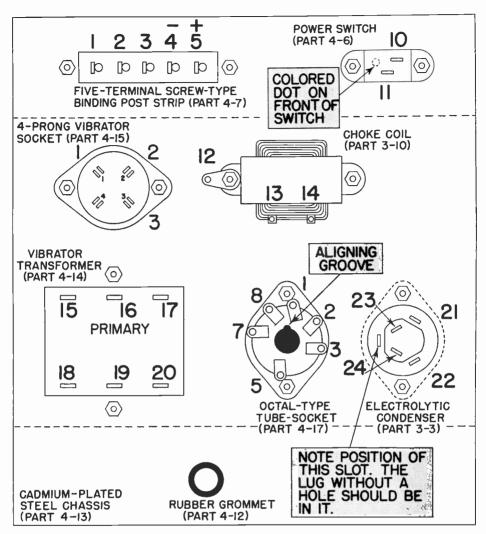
Bottom view of chassis with sides spread out, showing exact positions of all parts which are mounted directly on the chassis, and showing positions of all numbers which you are to place on the chassis and on the parts with metal-marking crayon. The dotted lines indicate the positions of the bends in the chassis.
